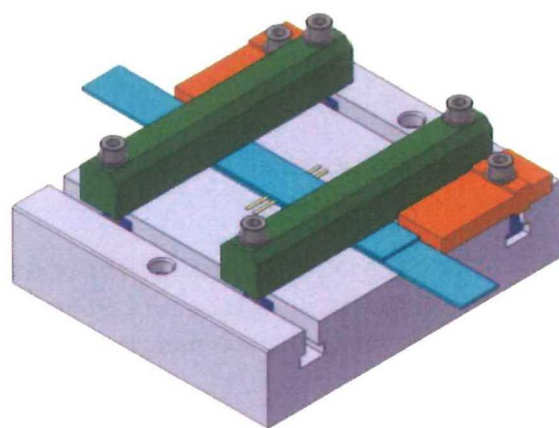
Fixture Z51414 in the double-side clamping configuration.
